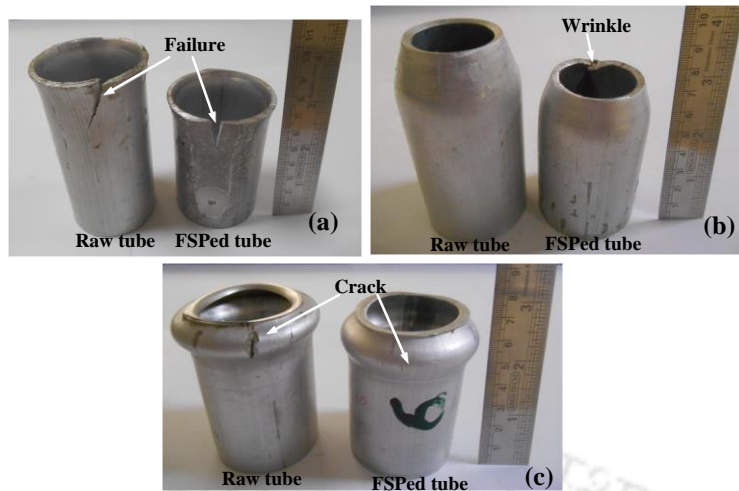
Comparison of end forming behaviour of, (a) tube expansion, (b) tube reduction, (c) tube beading, between unprocessed (left) and FSPed tube (right)
